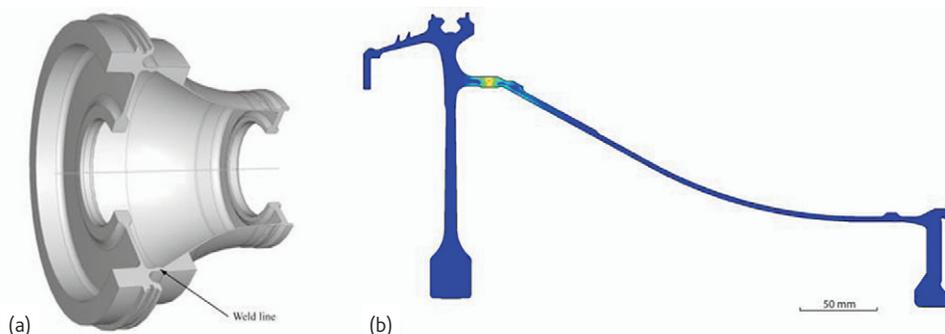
(a) Schematic diagram of the inertia friction welded high pressure compressor drum – drive cone (DDC) assembly. The circumferential weld line is indicated by the arrow. (b) Illustration of the residual stress map in the DDC in the final post-weld heat treated condition.
